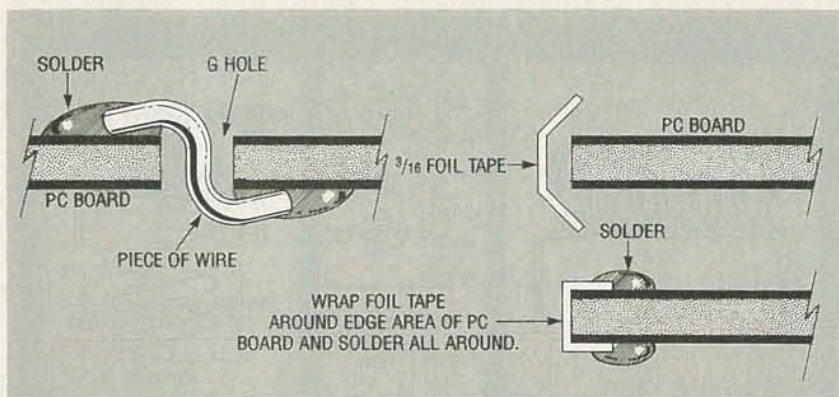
ALL HOLES MARKED "G" in Fig. 4 must have jumper wires passed through them that are soldered on both sides of the PC board as shown here. Also, both sides of the board must be grounded together with copper-foil tape as shown.
